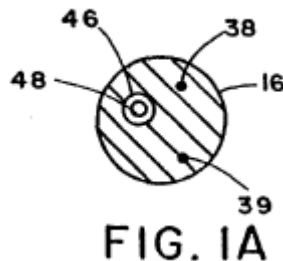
A illustrates a sectional view of the disclosed smoking device that depicts plug 16, tube 48, passageway 46, and electrical connectors pins 38, 39.
